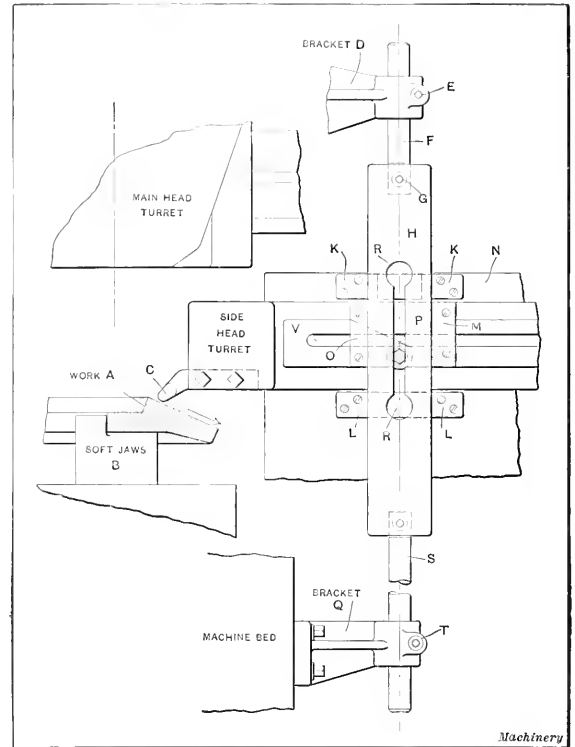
Taper Turning Attachment for the Bullard Vertical Turret Lathe
